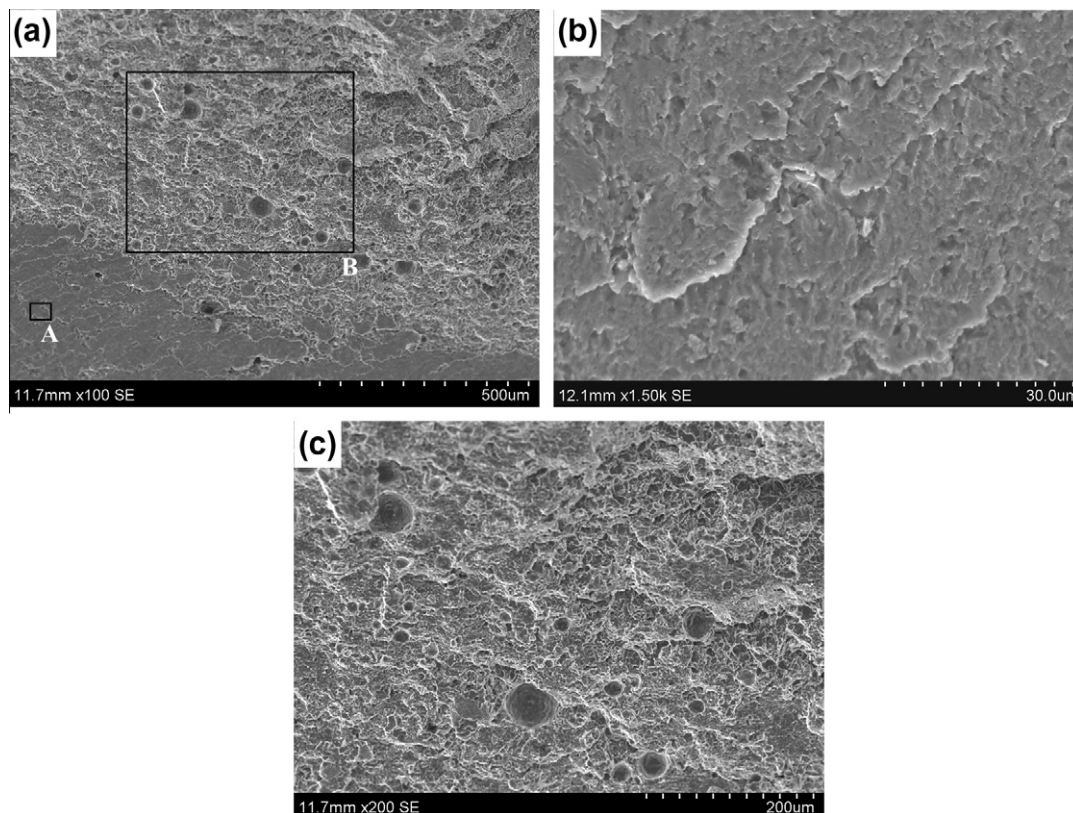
Fracture surfaces of the joints welded at 110 A: (a) at the fracture surface of Al alloy side of the joint. (b and c) are magnified images taken from the zones marked A and B in Fig. 10(a).
